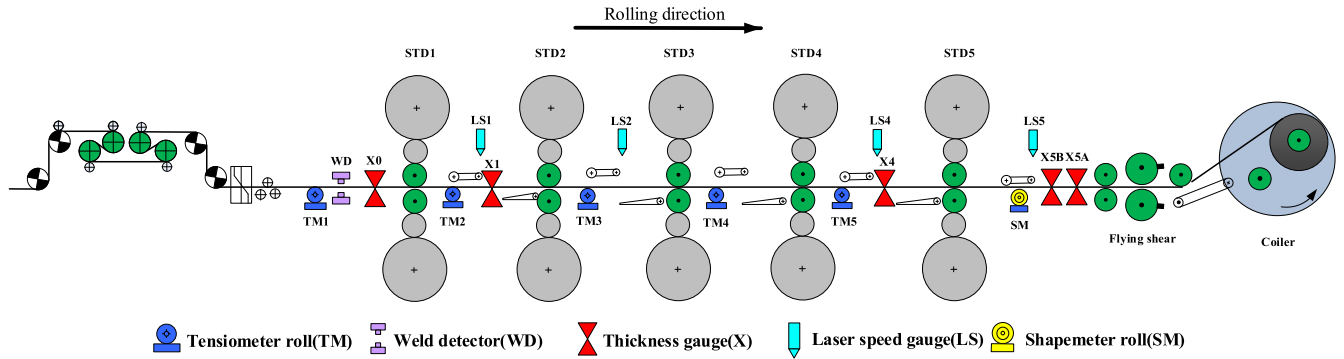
Equipment layout of a five-stand tandem cold mill.
